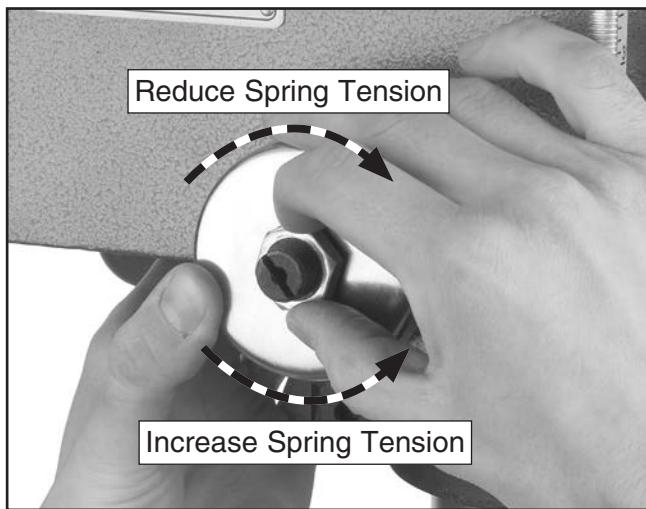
Loosening cover and jam nut to adjust return spring tension.
